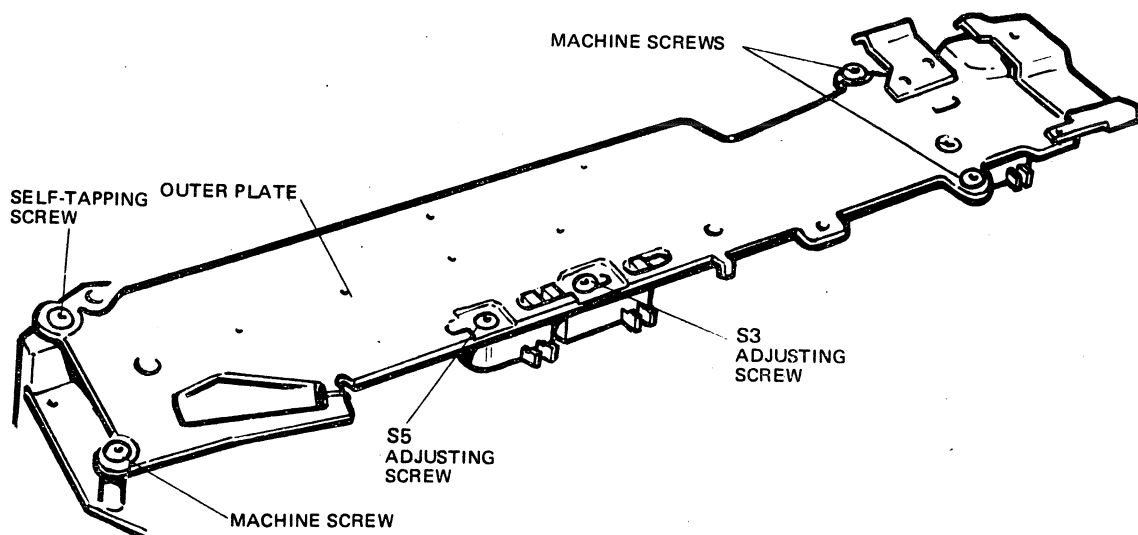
OUTER PLATE MOUNTING SCREWS
